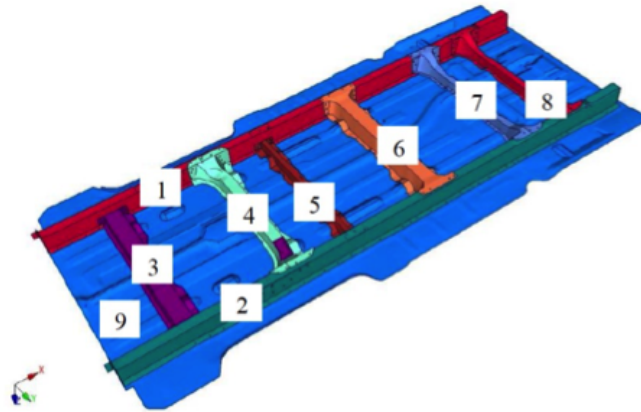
Floor structure, containing rails numbered from 1 to 8 and a panel 9.
